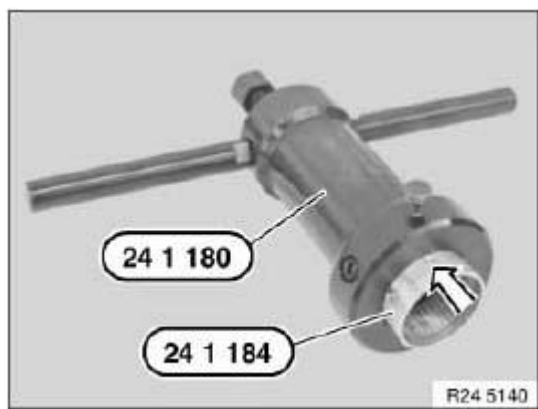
Sliding Special Tool 24 1 184 Into Extractor 24 1 180
